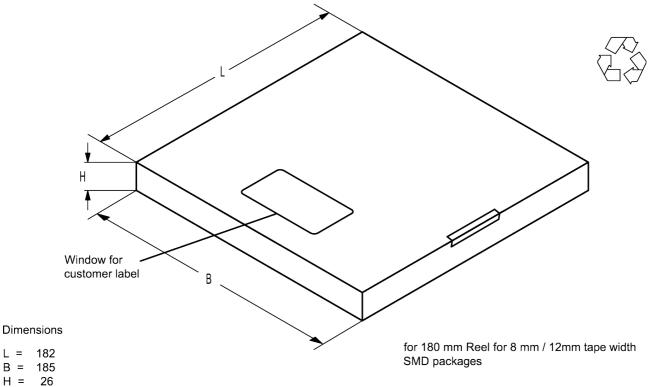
Drawing of folding box for reel with diameter of 180 mm.
